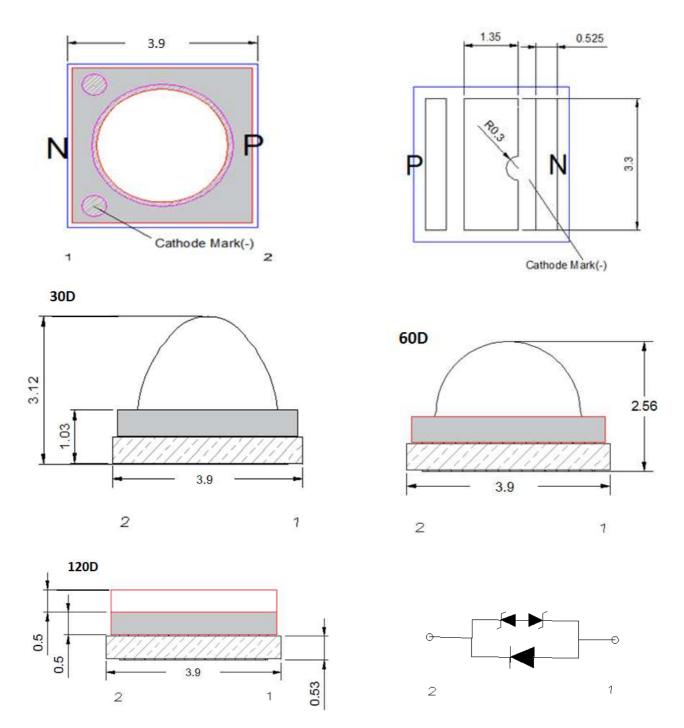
IN-C39ATO / IN-C39BTO / IN-C39CTO Package Dimension
